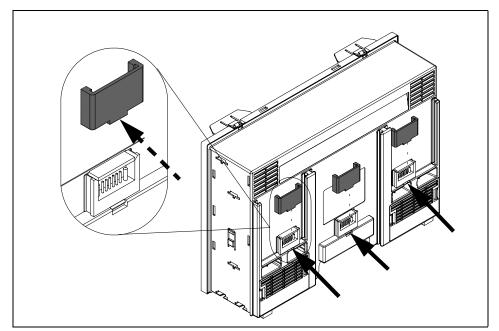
Slide-Lock Covers On Rear Housing Connectors
